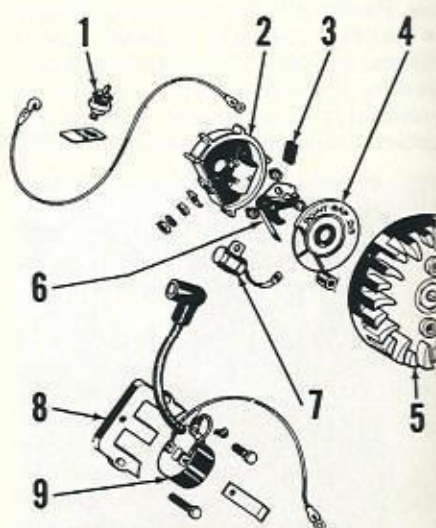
Exploded view of magneto used on models 340, 945, 1630, 1631, 1644 and 1645. Ignition timing is fixed.
